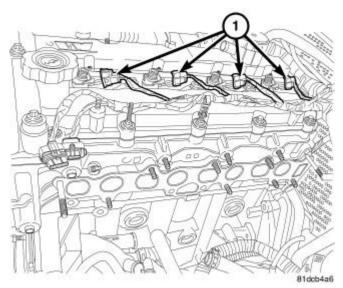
Fuel Injector Harness Courtesy of CHRYSLER LLC
